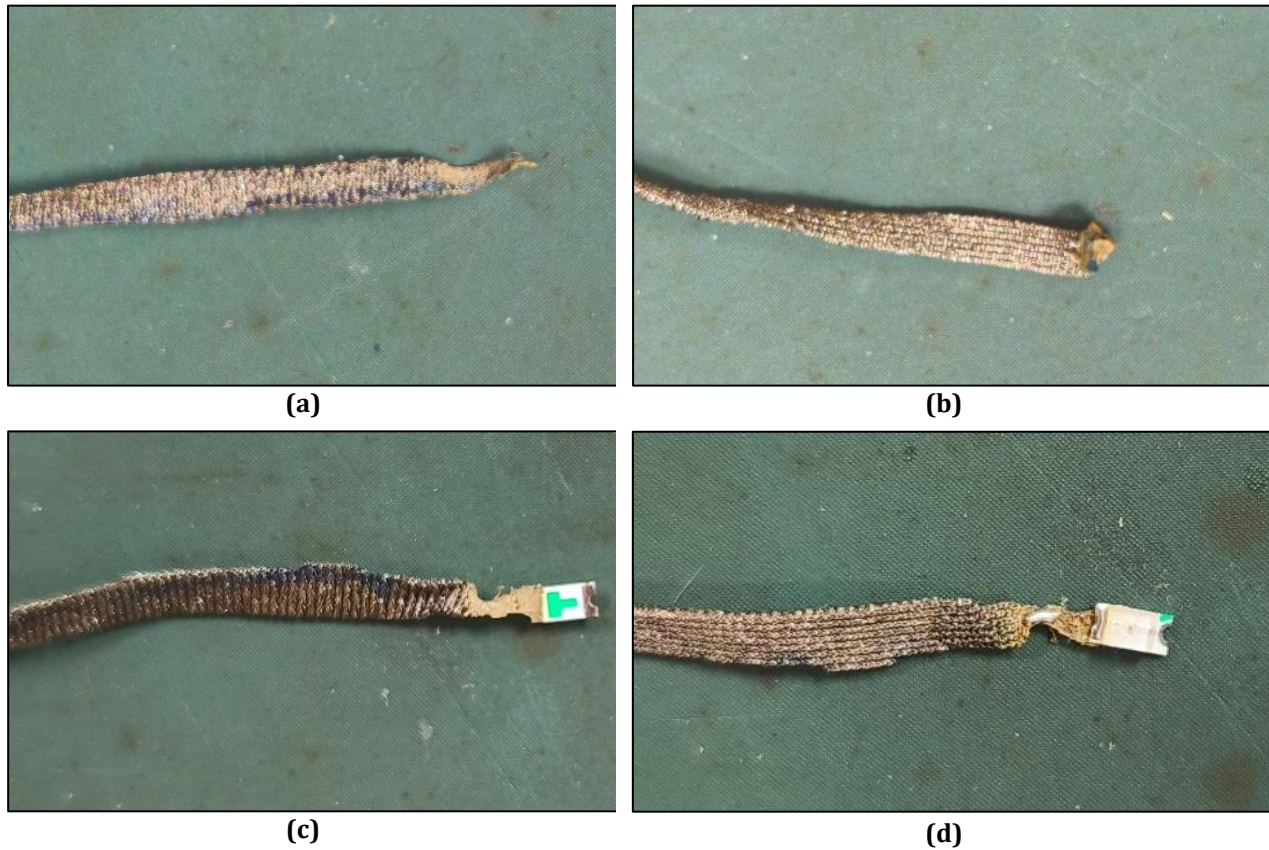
Soldering effect (a) Soldering at 450°C; (b) Soldering at 350°C; (c) Back view of soldering at 300°C; (d) Front view of soldering at 300°C
